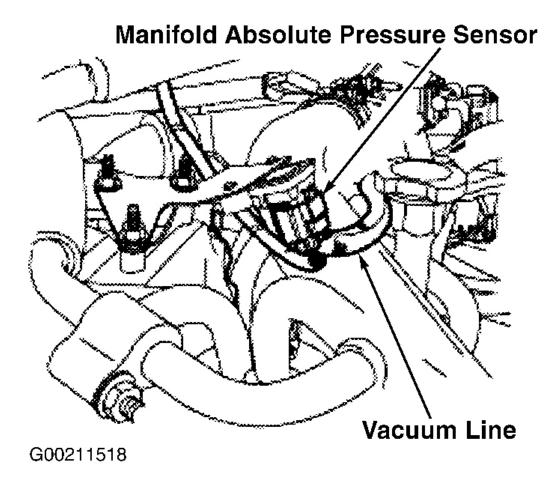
Locating Manifold Absolute Pressure Sensor (Excursion & "F" Series) Courtesy of FORD MOTOR CO.
